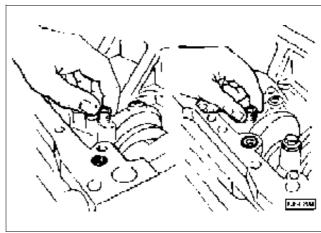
Install the socket head screw plugs in the positions shown in figure;
